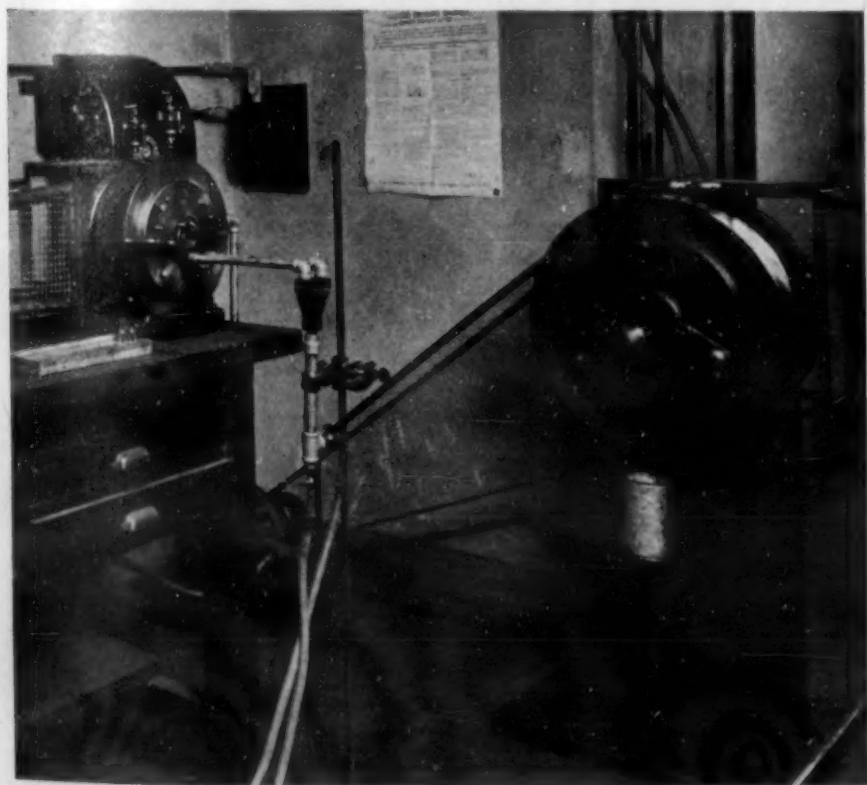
Swaging Machines Used in the Mechanical Working of Metals. Both Hot and Cold Swaging Can Be Done
